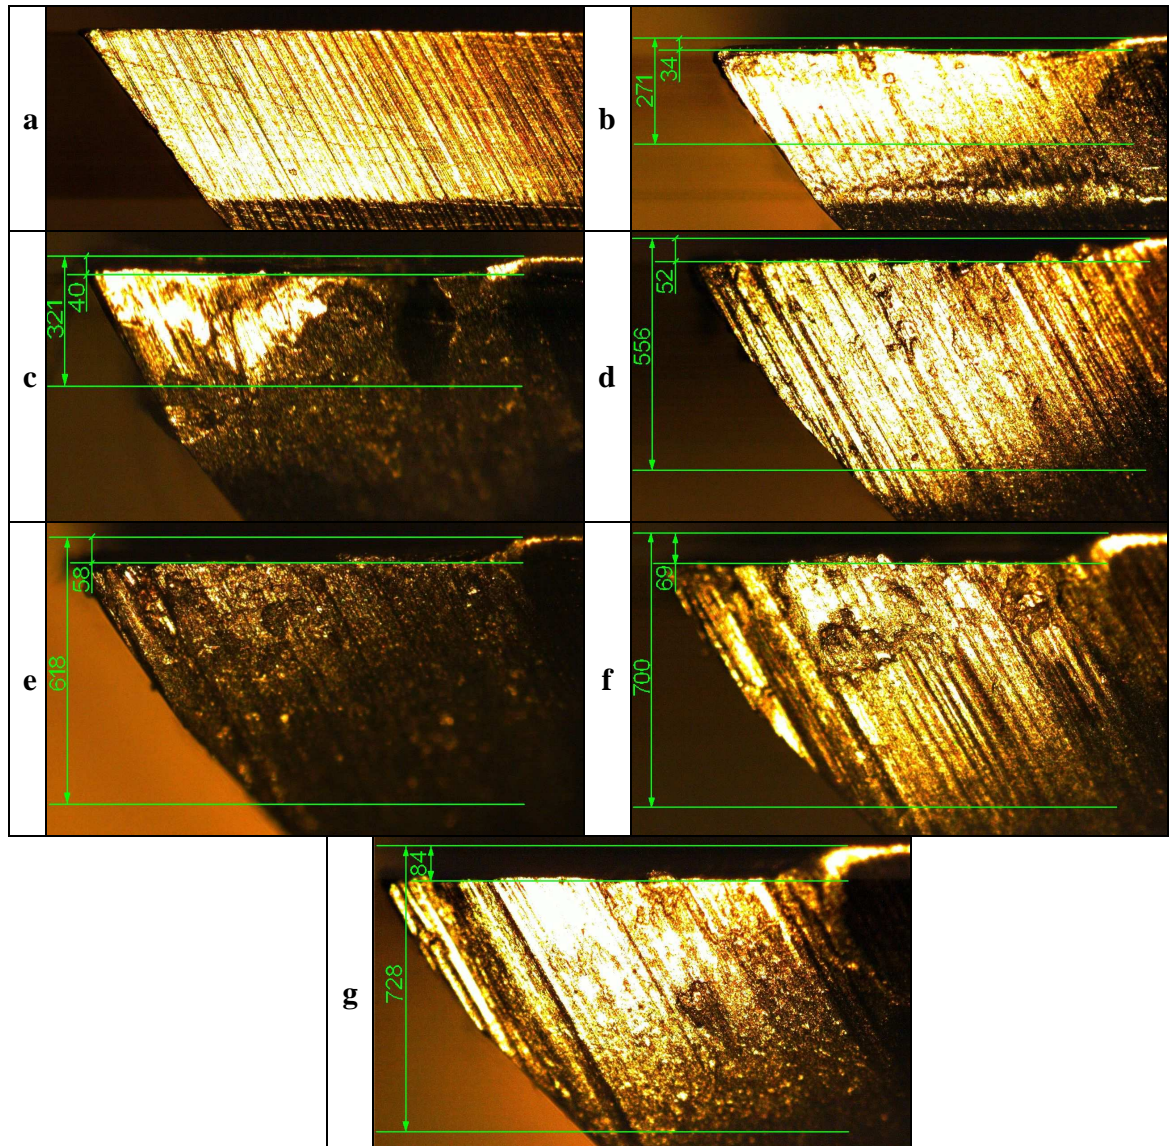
MTE 9mm end mill tooth # 2 trochoidal toolpath clearance face wear a) Fresh tool, b-g) After pass 1-6 (each 54 mm length, 27 mm width, 1 mm depth).
